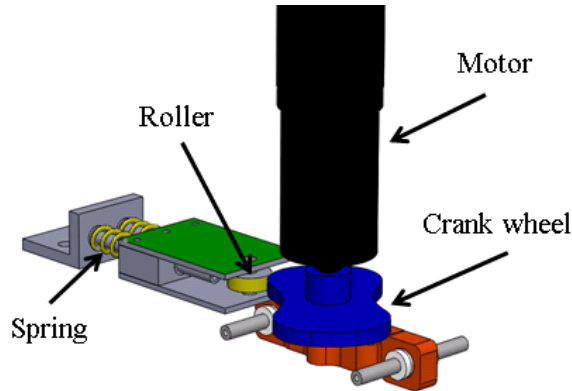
The First design of the adjustable Scotch yoke mechanism with springs.
